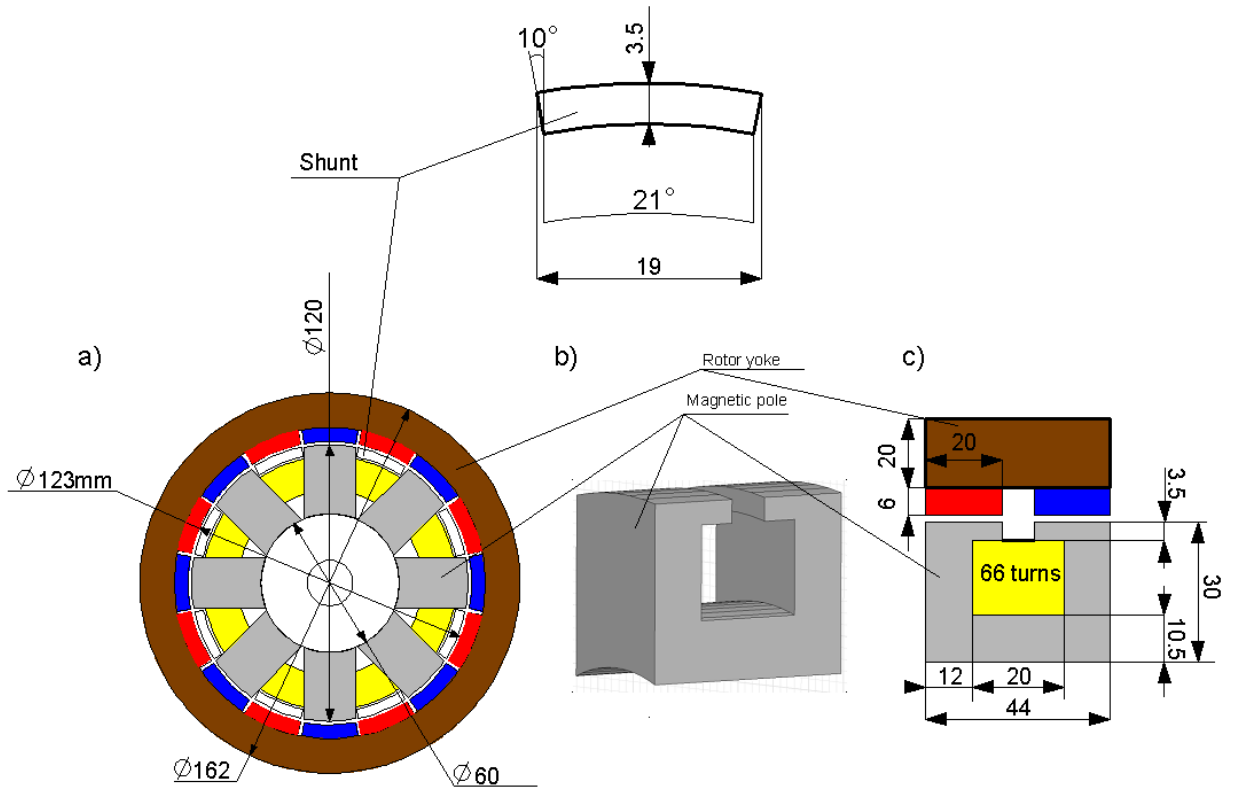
Optimized dimensions of the generator: a) radial cross-section, b) stator pole view, c) axial cross-section view
